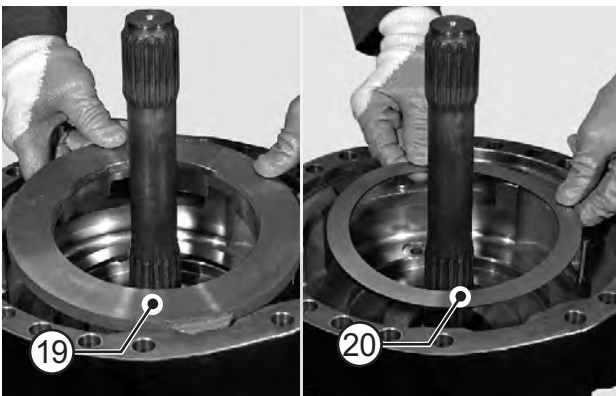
Remove spacer-braking discs (19) and shims (20), noting down direction of assembly.
